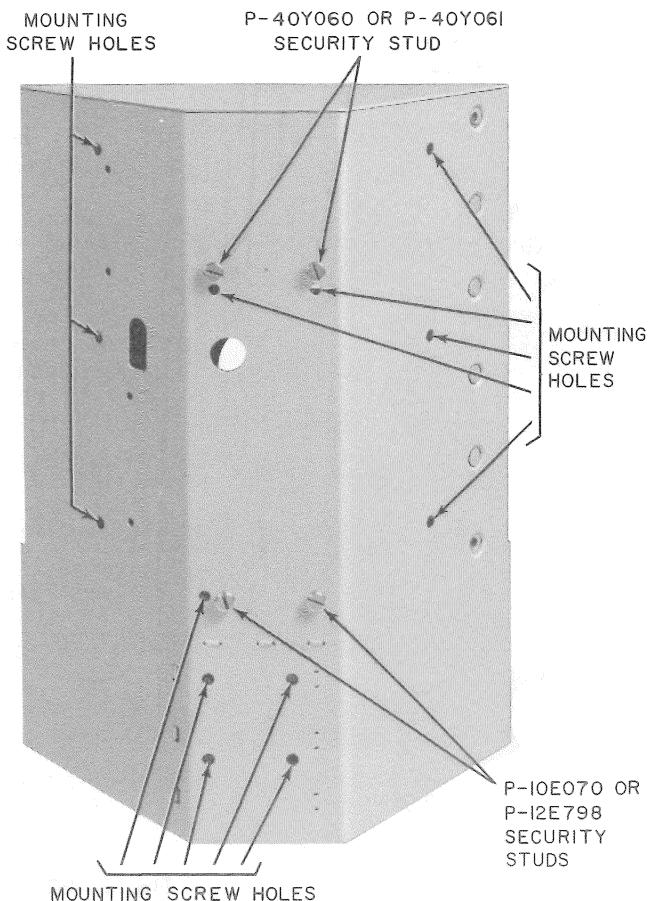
Location of Mounting Screw Holes and Security Studs in 2-Type Set
